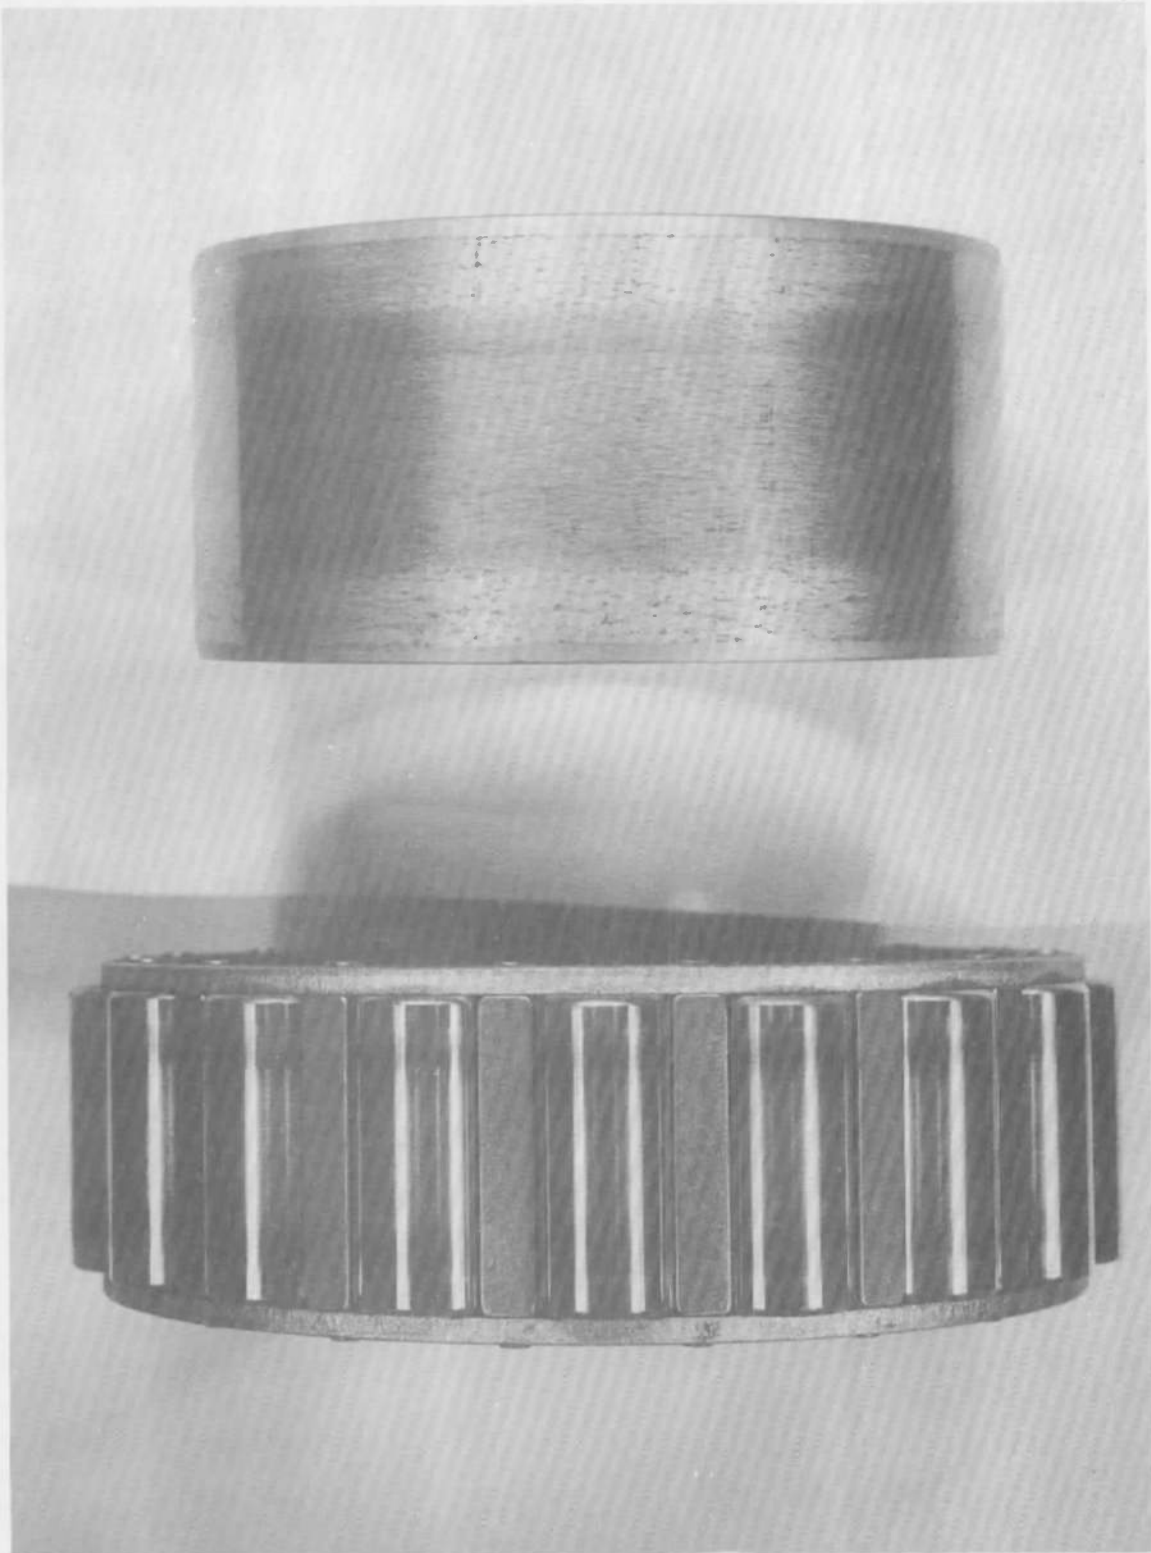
Test No. 5 (one of 4 bearings) – View of I.R. and Roller-Cage Assembly from Cylindrical Bearing – ATL's Developmental Glass + MoS_2 Coating Appears Intact and "run-in"
